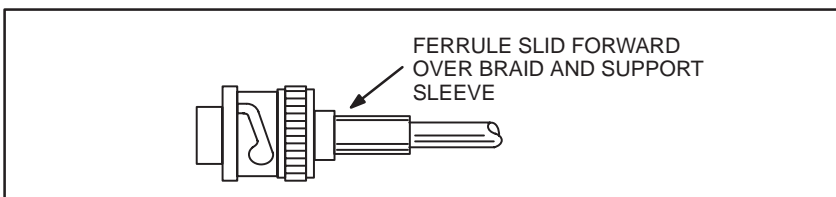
Connector Installation Step 8 for RG-59/U Cable
